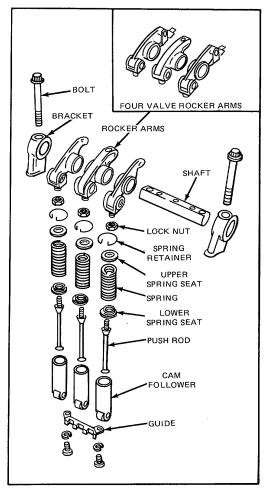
Valve and Injector Operating Mechanism and Relative Location of Parts
